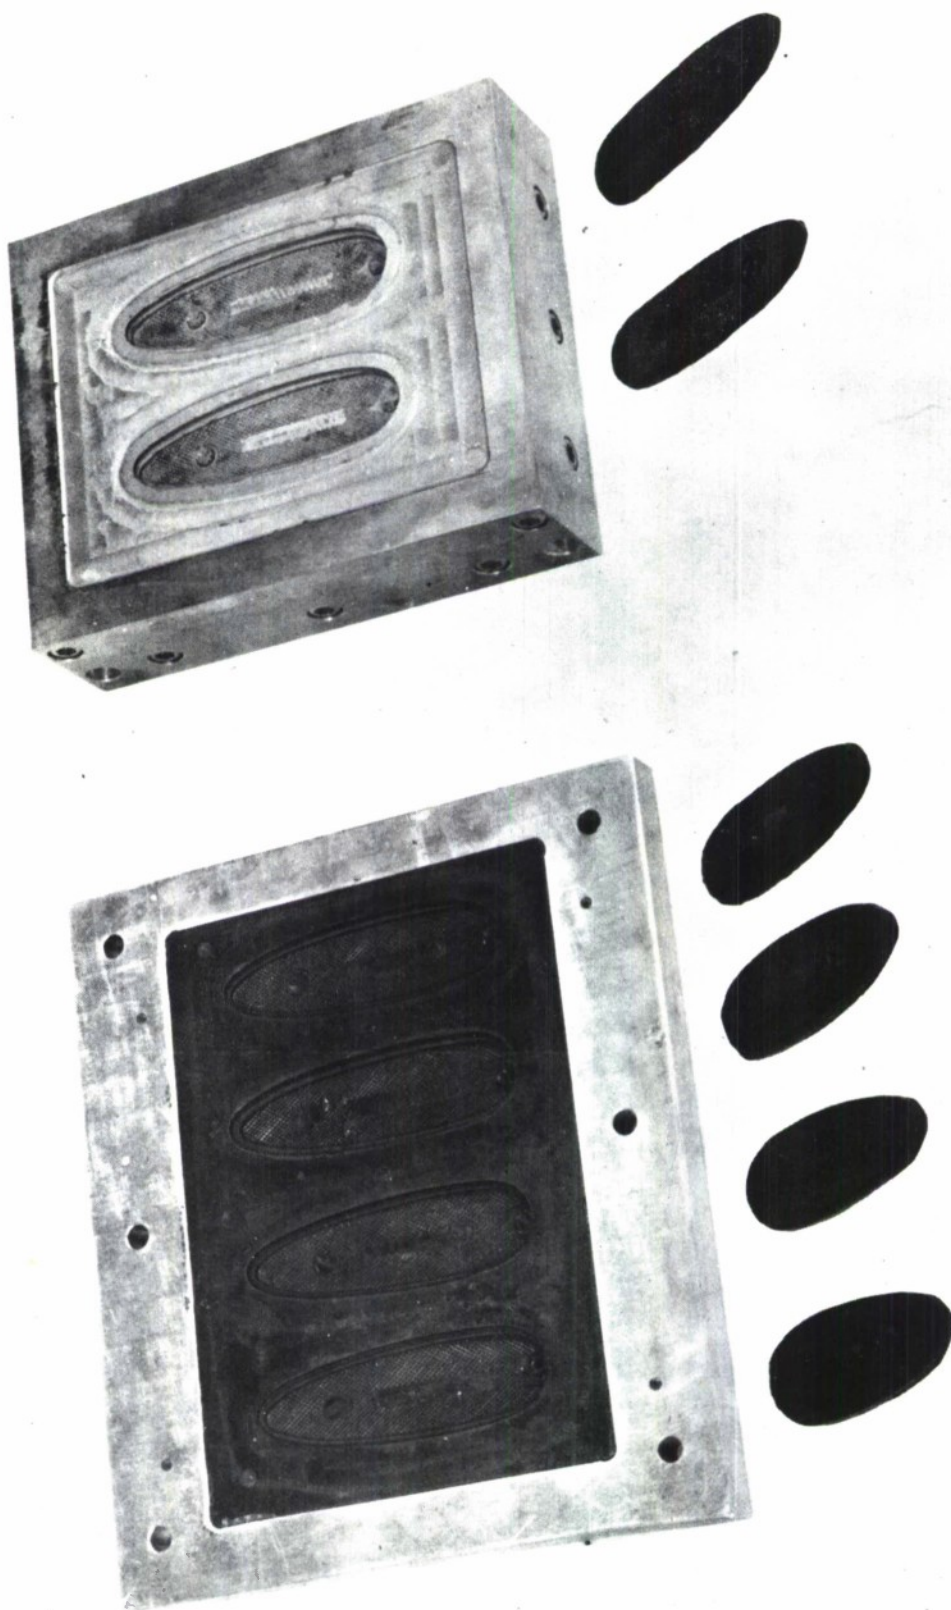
U. S. Gypsum Company S-408 Hy-Temp Surface Coat- Casting Resin four cavity mold (right) and Devcon C two-cavity mold (left) with compression molded rubber components for the M1912 Shotgun Butt Plate, PN 7311016,
